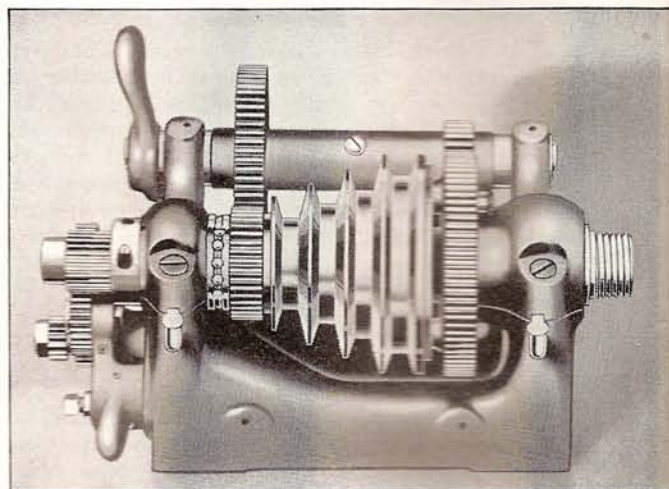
Headstock of 9-inch "Workshop" Lathe (with Gear Guards Removed) Showing 4-Step Cone Pulley for V-Belt Drive.
